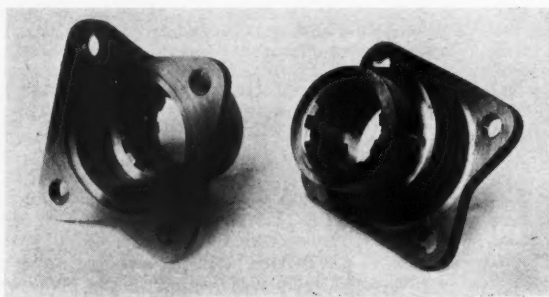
Flange couplings produced on a Wickman chucking automatic with spindle location attachment.
